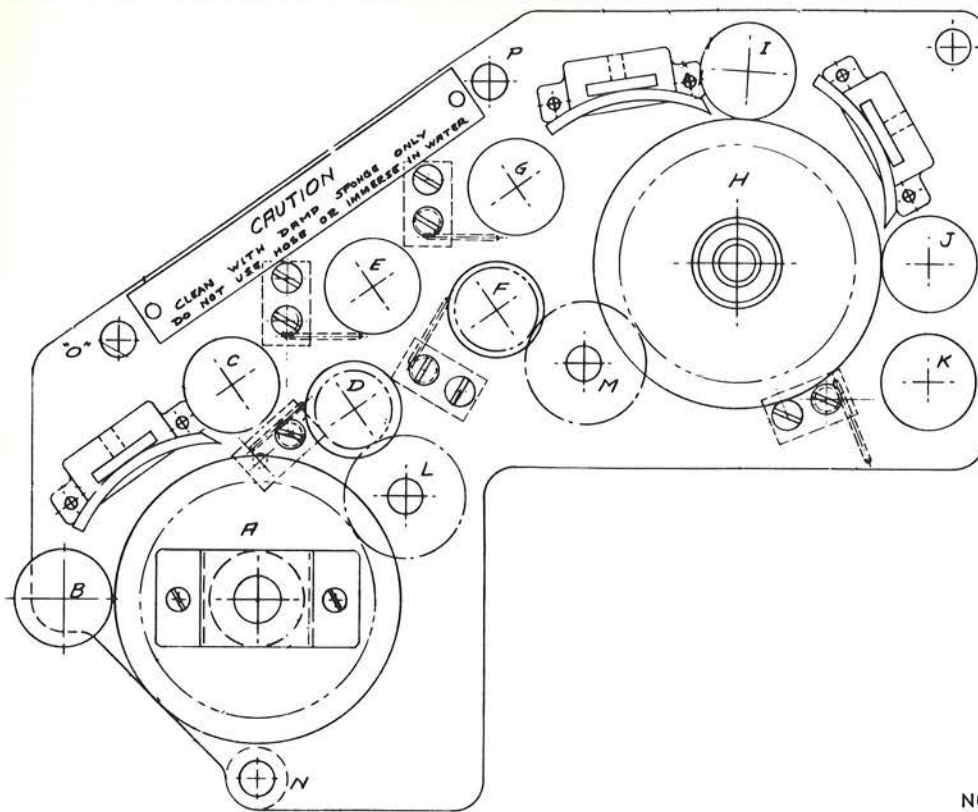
SQUEEGEE CROSSOVER ASSEMBLY
